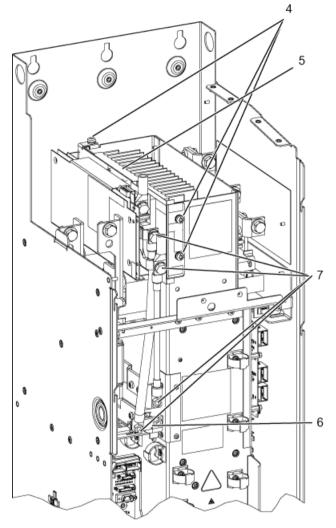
Installing the Braking Module in an Active Line Module / Motor Module, frame size FX – steps 4 - 7
